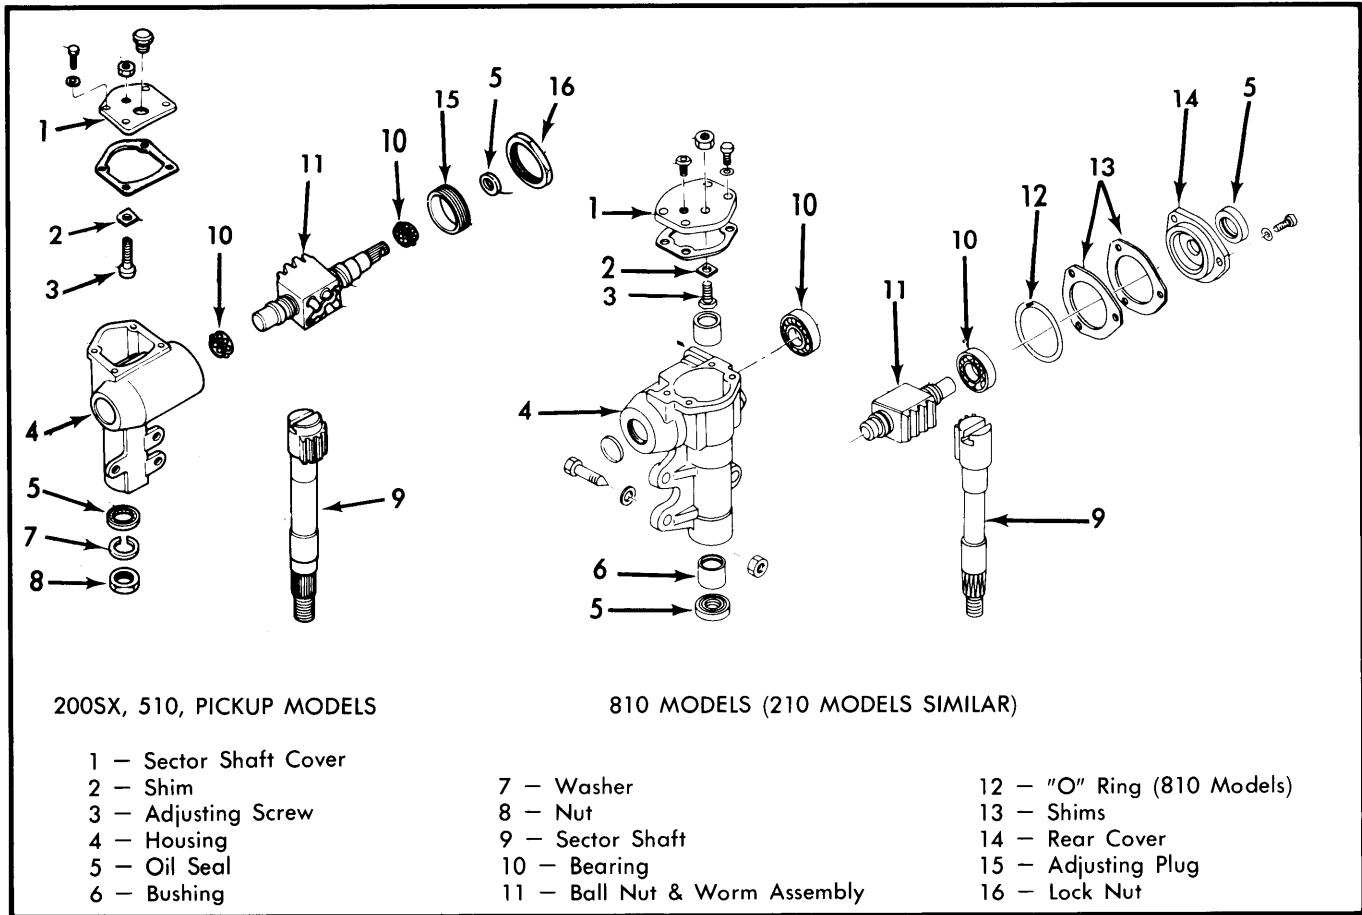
Exploded View of Datsun Recirculating Ball Steering Gear Assembly
